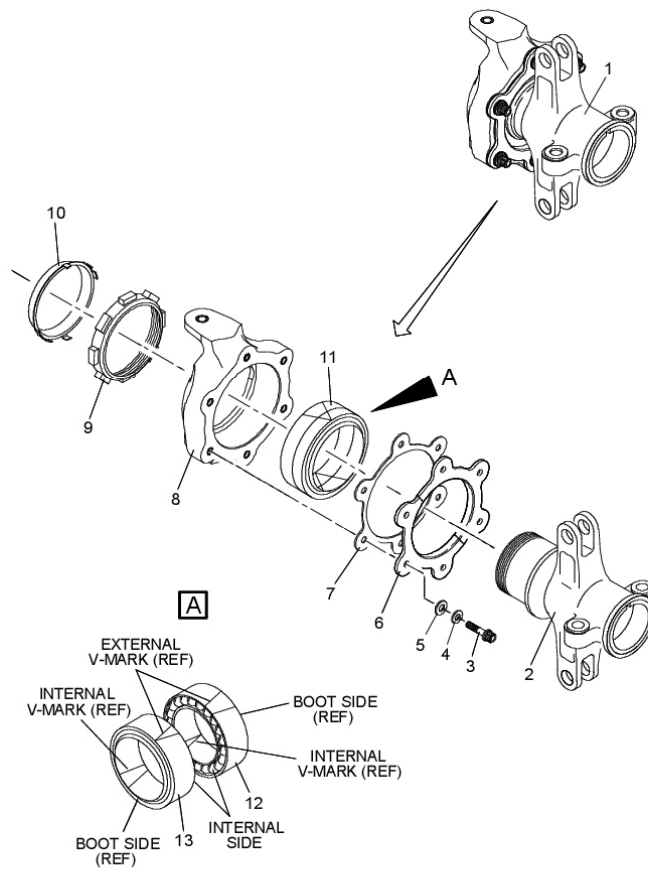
(sheet 3 of 4). Housing and slider group - Disassemble procedure (Sleeve assy P/N 109G6430A03)
